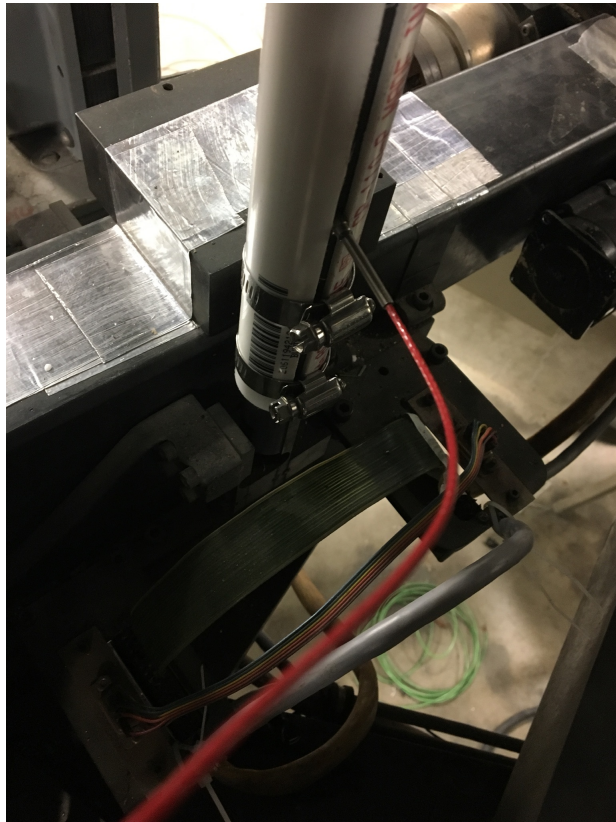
Lift Pushrod Brace Installed, MKIb design
